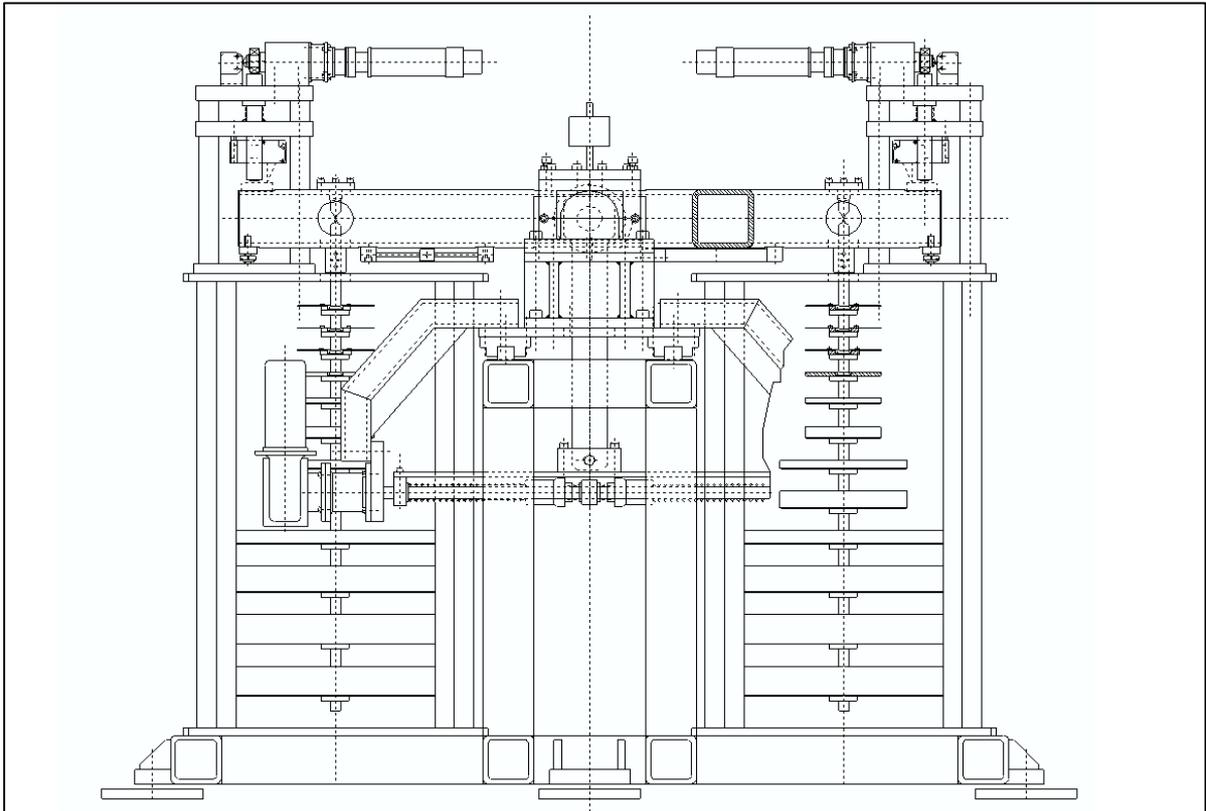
Front view of the 1 kNm Torque-Standard Machine
